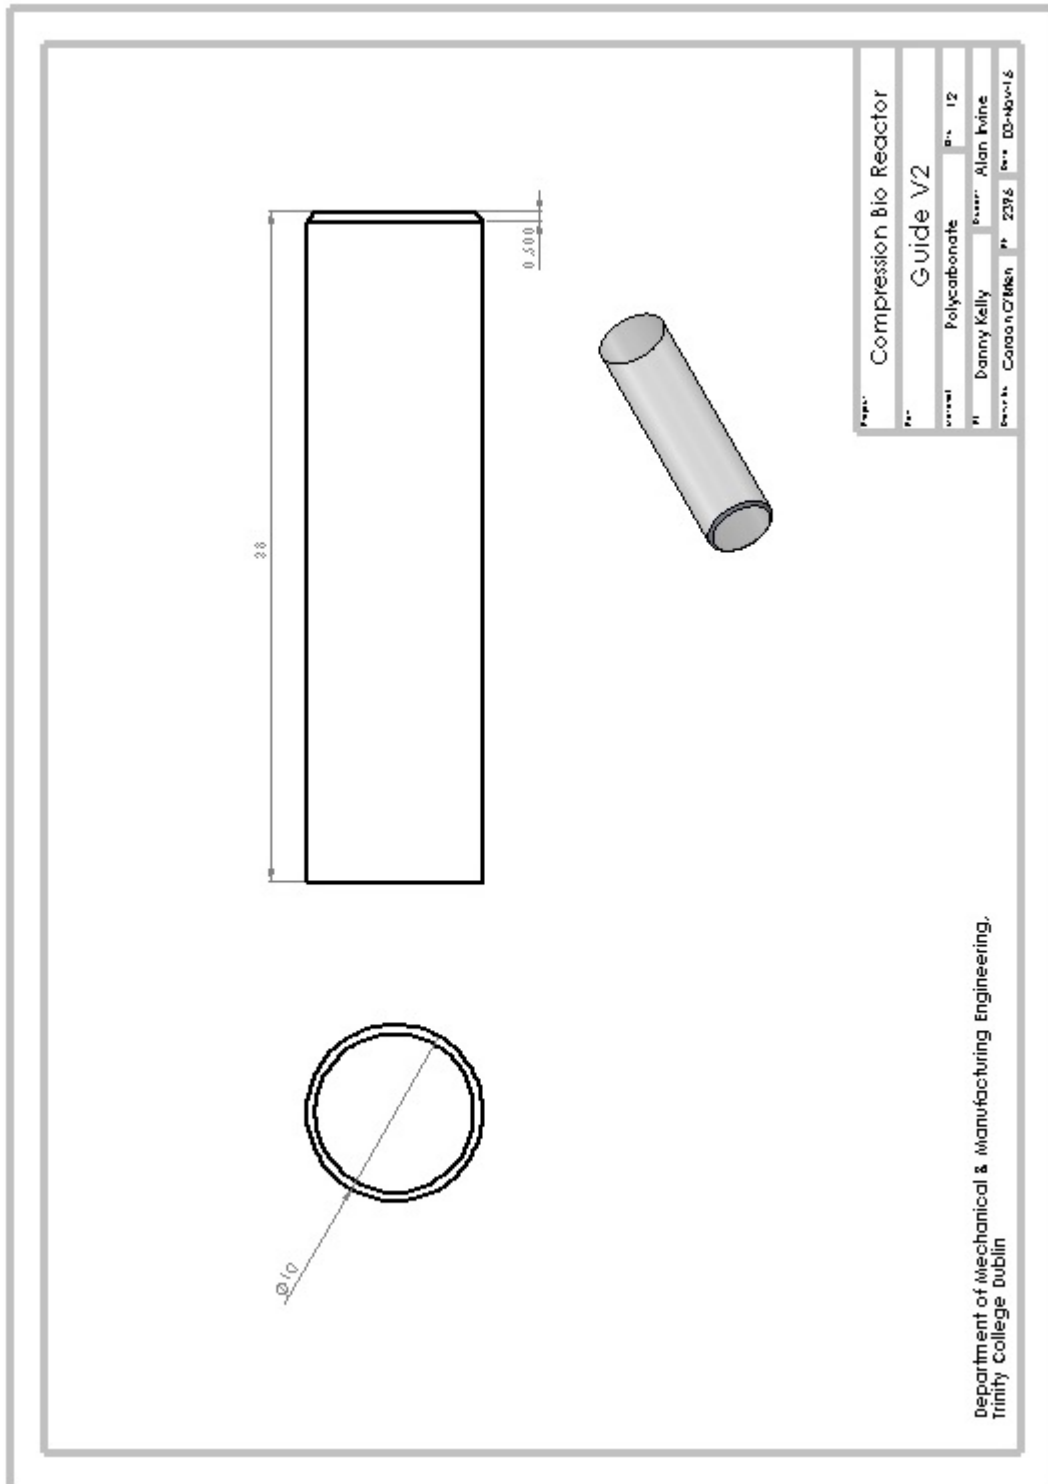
Technical drawings for the guide posts to direct motion of the platen by preventing possible rotation.
